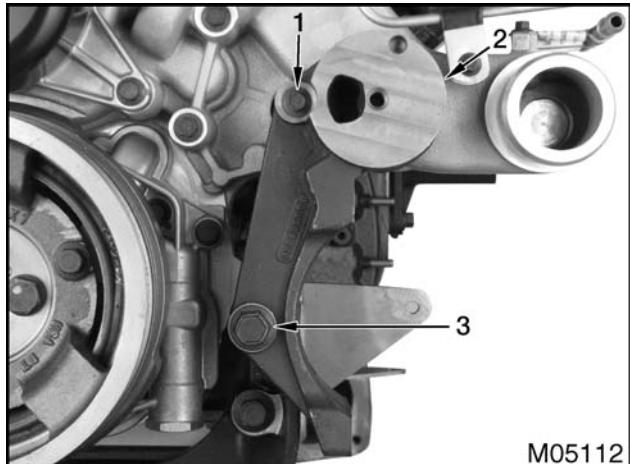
Auxiliary accessory mounting bracket (if equipped)
